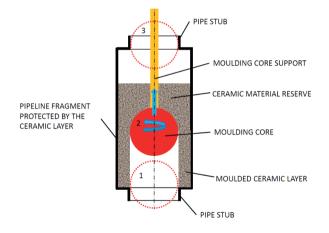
A diagram illustrating the machine method of anti-erosion, ceramic coat forming in an element of a pipeline
